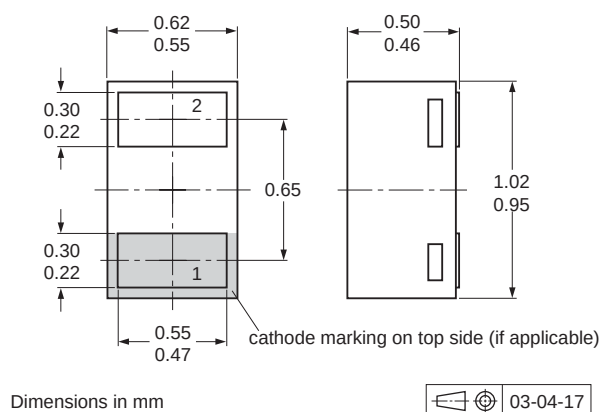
Package outline BAS16L (SOD882/DFN1006-2)
